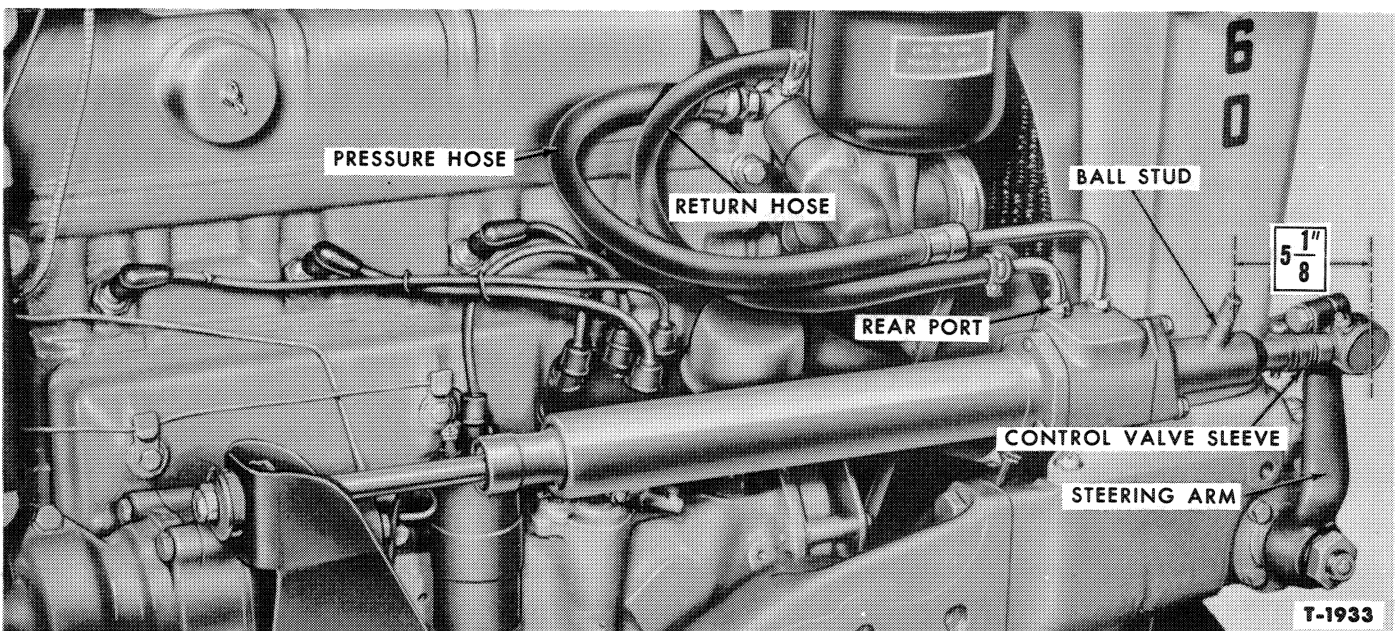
Adjustment of Power Cylinder and Control Valve to Steering Arm
